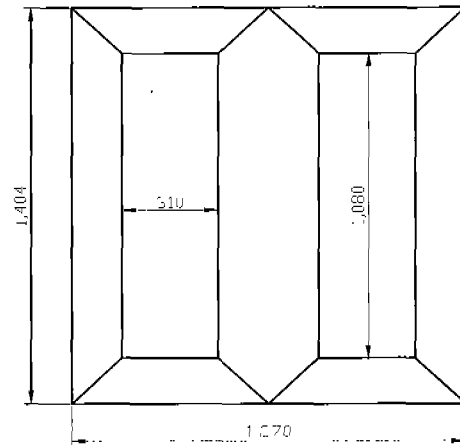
Dimension of the shell type core for 1MVA HTS transformer
